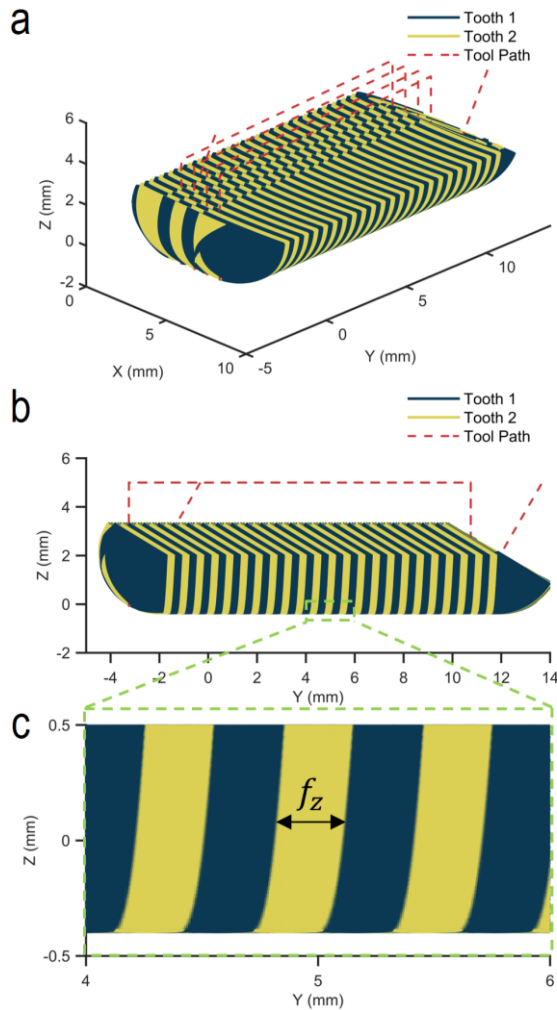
Trochoidal movement of the cutting edges; (a) isometric view, (b) side view, and (c) magnified view of the feed per tooth ($f_z = 0.3$ mm/tooth) interval between consecutive cutting edges at the outermost part of the trochoidal movement.
